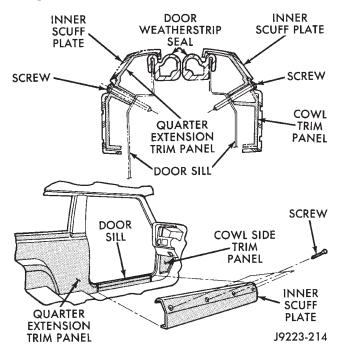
Front Inner Scuff Plate—2-Door Vehicles
